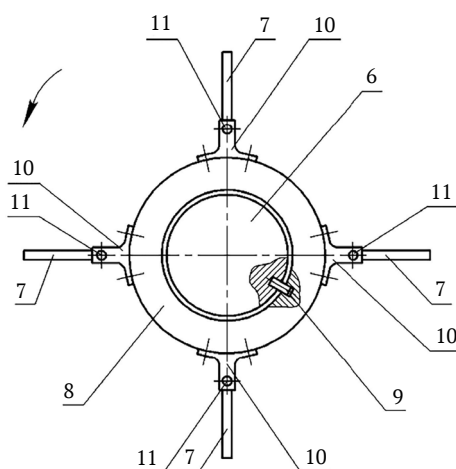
Installation of rubber blade pairs on the drive cleaning shaft
